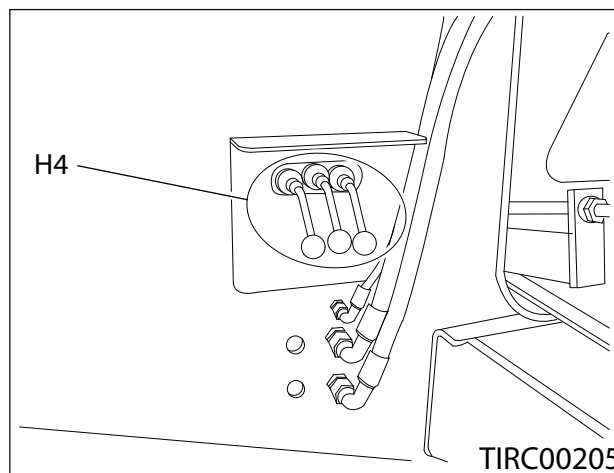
Fines Side Conveyor control valve unit (H4)
